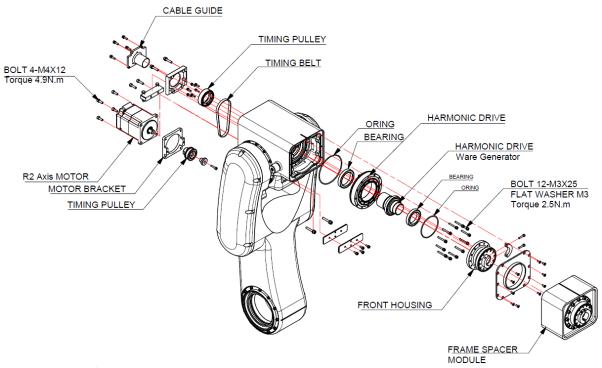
Axis-R2 Reducer Disassembly Diagram [HA006L]
